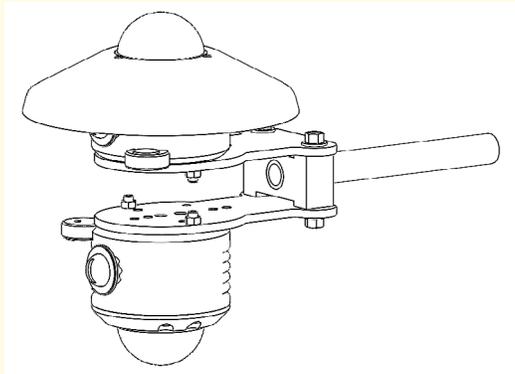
Bracket assembly 14396 permits two NRG R1 Pyranometers to measure albedo.
